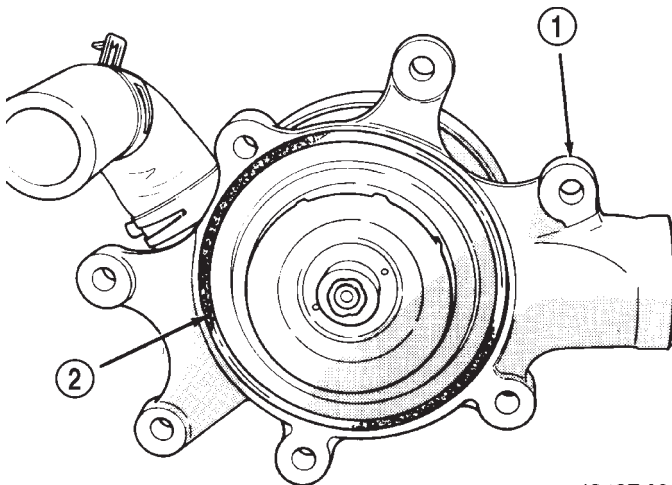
Water Pump O-Ring Seal—8.0L V-10
